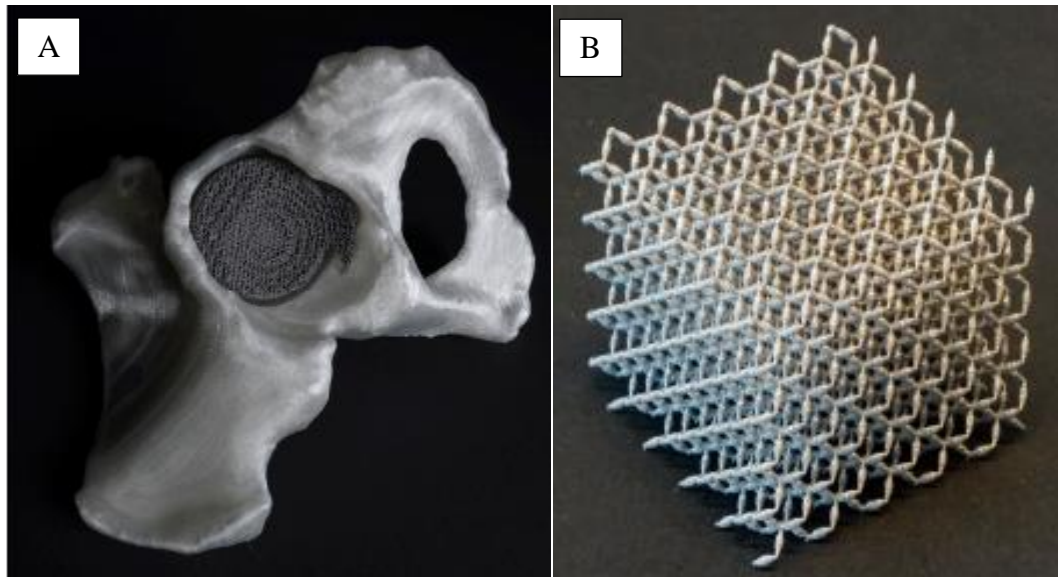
(A) Manufacturing patient-specific part by using SLS (B) Manufacture penta-model by using SLS technique [3]
